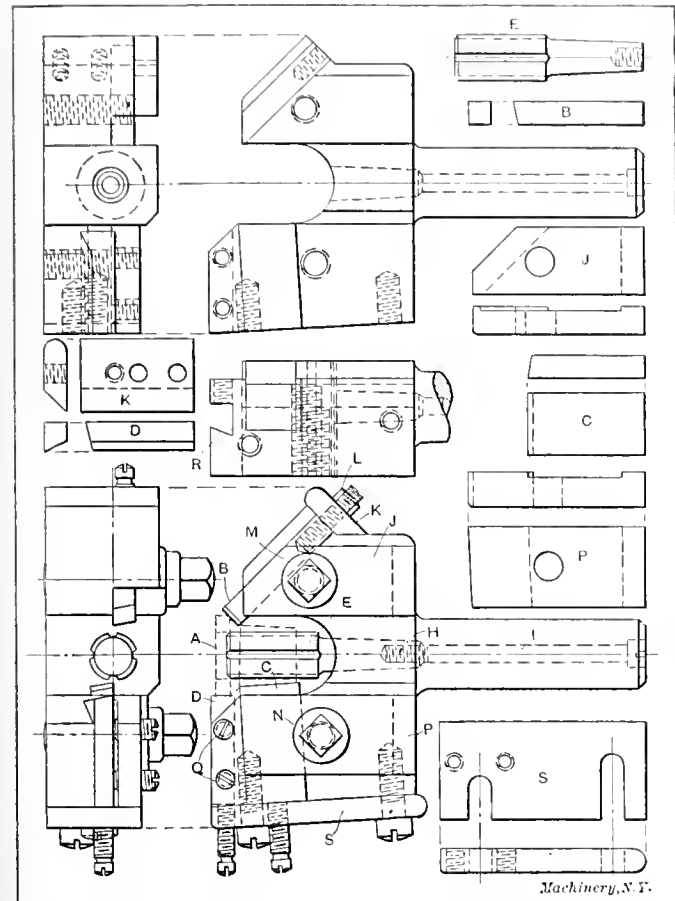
Tool for Finishing the Bushing of a Double Taper Cone Bearing
